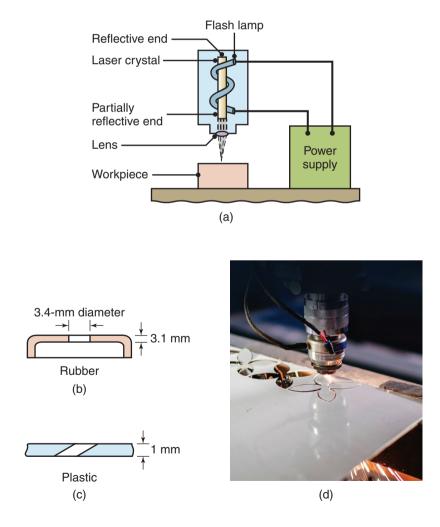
(a) Schematic illustration of the laser-beam machining process. (b) and (c) Examples of holes produced in nonmetallic parts by LBM. (d) Cutting sheet metal with a laser beam. *Source:* (d) Courtesy of SPI Lasers UK Ltd.
